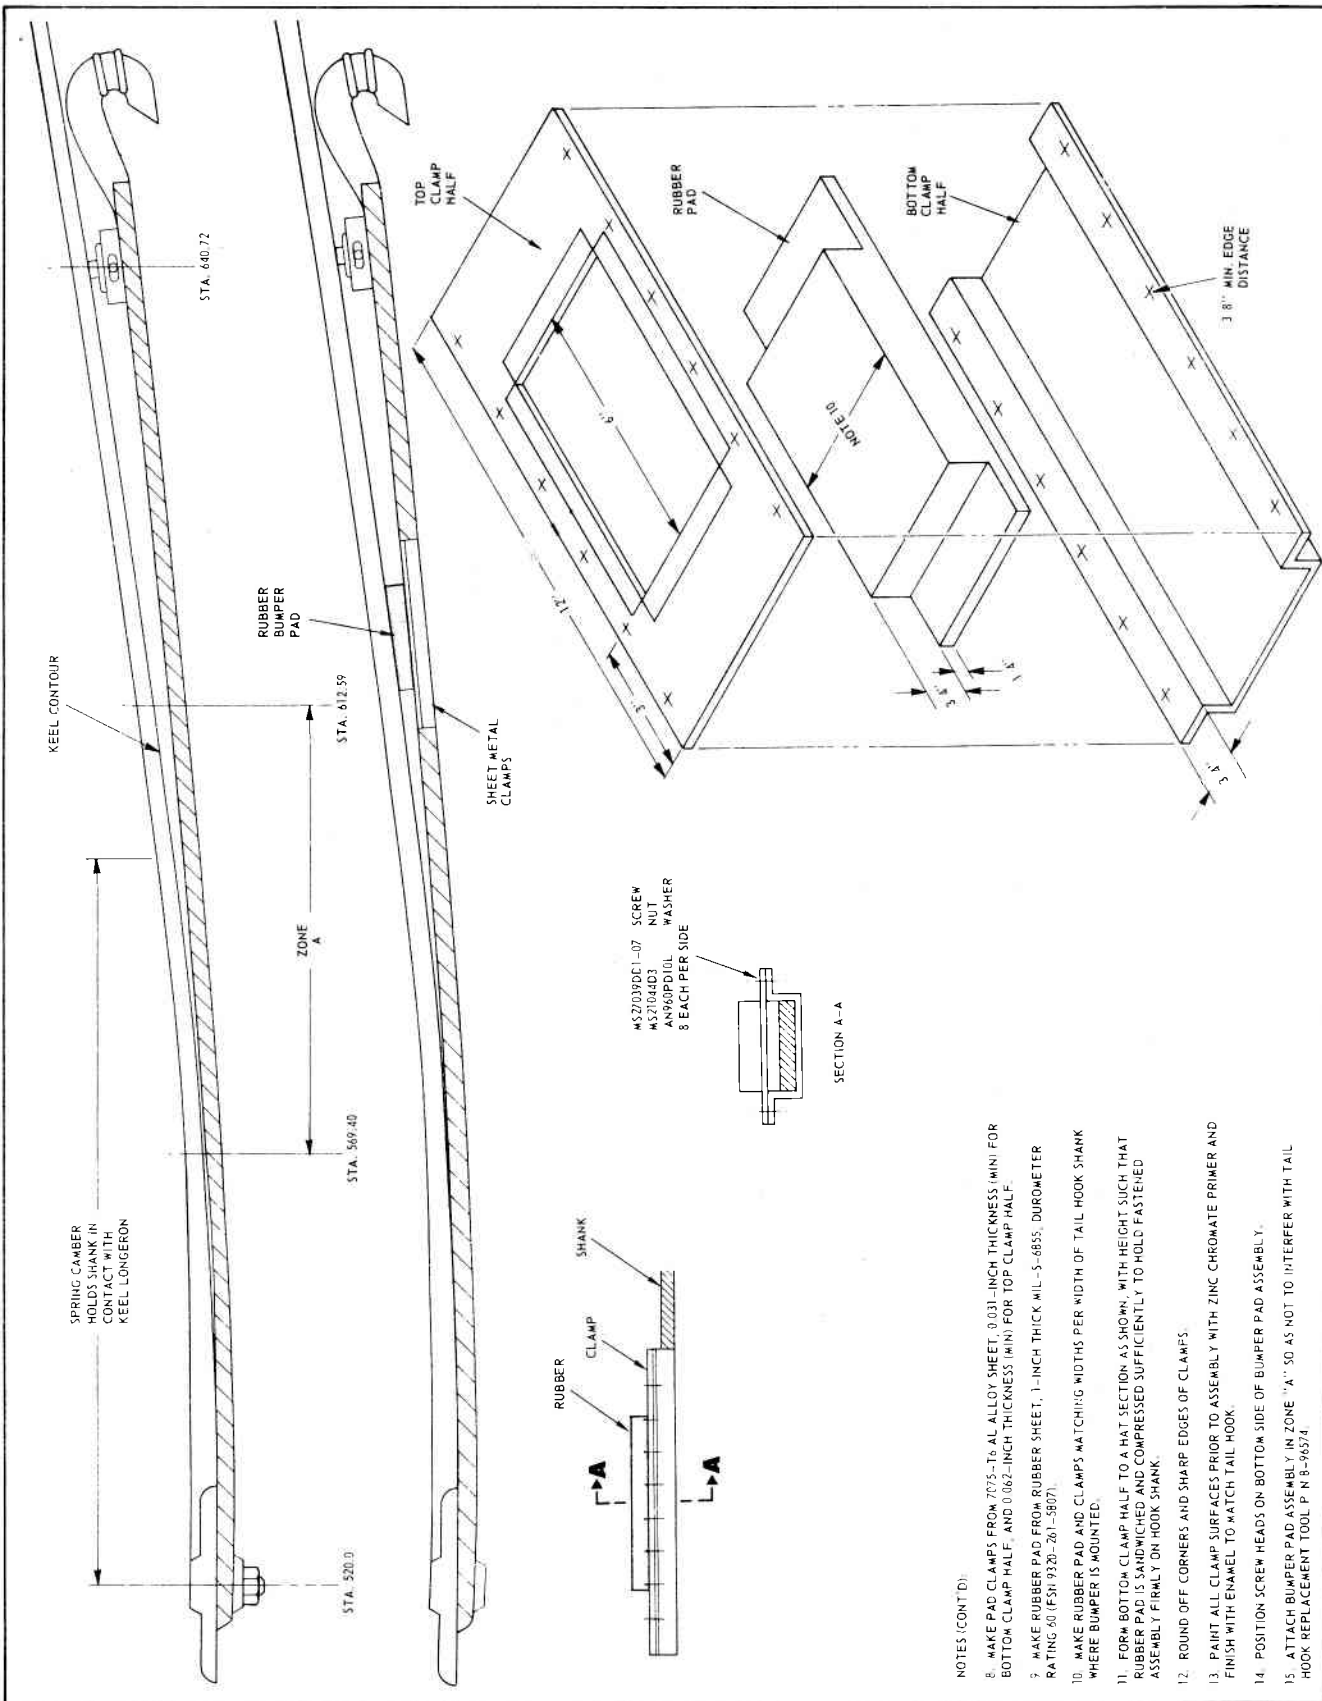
C. Tail Hook Bumper Pad and Bumper Plate Installation (Sheet 2 of 2)
